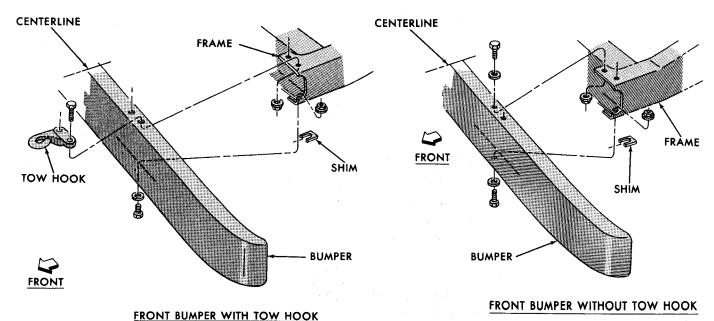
Front Bumper and Tow Hook (D-5-6-8 W6-S6)
